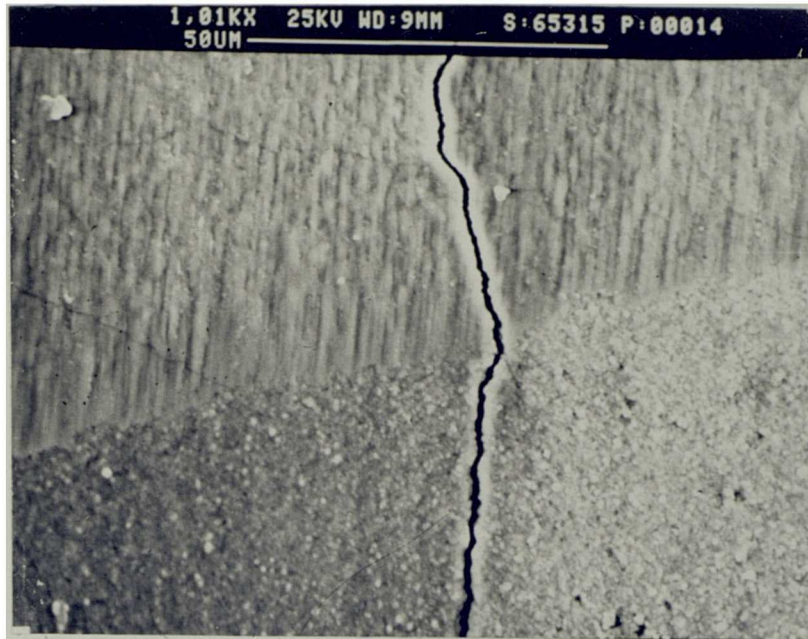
shows the K68 tool after 4 minutes cutting at the speed of 75 m/min, showing the flank face surface has worn unevenly developing equal sized grooves. The light coloured particles are WC and have been dragged away off the cutting edge.
